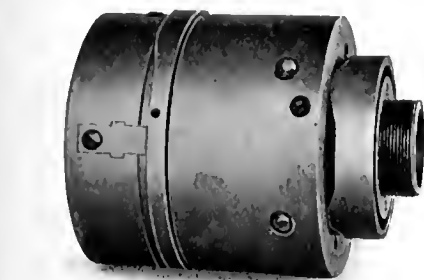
Automatic Roller Feed Mechanism removed from the Machine, showing Compact Construction
